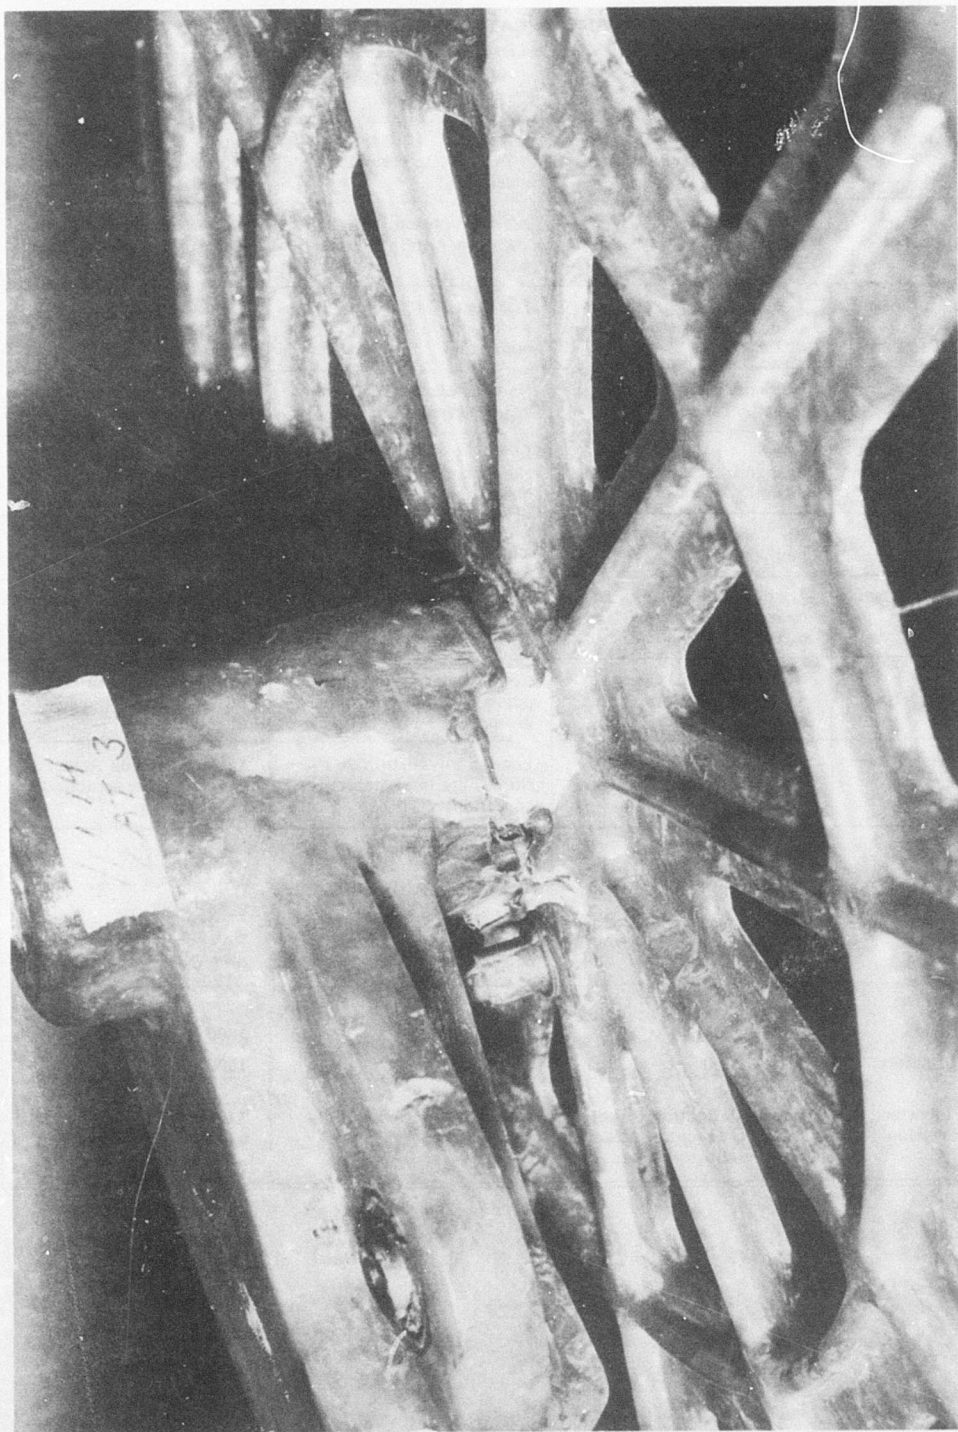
Quadrant Assembly After Category 3 Failure Load Test.
